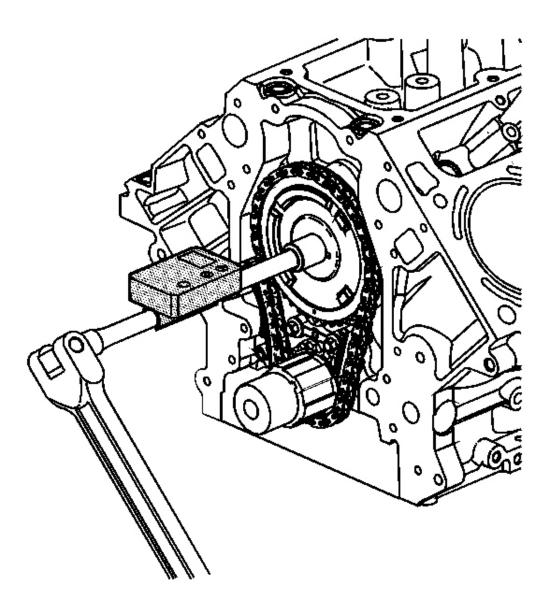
Tightening Camshaft Sprocket Bolt Courtesy of GENERAL MOTORS CORP.
